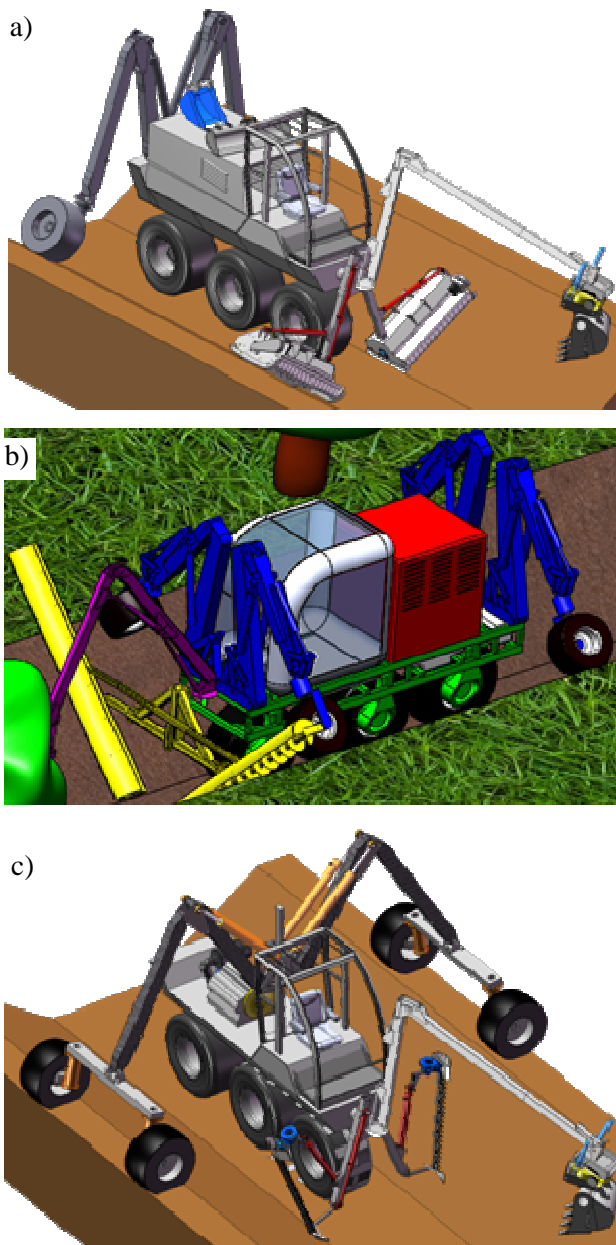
Three positions of the machine supported on three points during movement into the ditch (top view sketches): a) machine is under the ditch before maneuver of putting to the ditch, b) machine is in the course of movement into the ditch, c) machine finishes maneuver of putting into the ditch, but is above the bottom of the ditch
